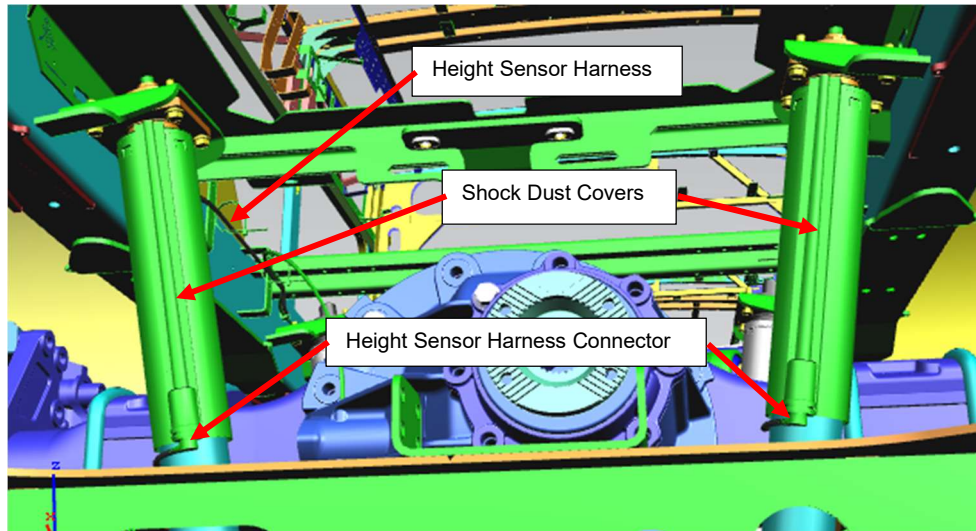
Rear Shock absorbers upper hardware (drive shaft removed for clarity).
